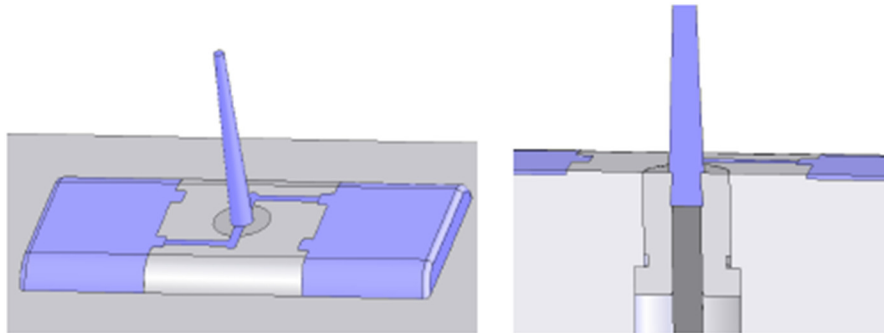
(a) Mould with sprue puller; (b) Sprue puller with runner (DS, Standard Components, 2008)
